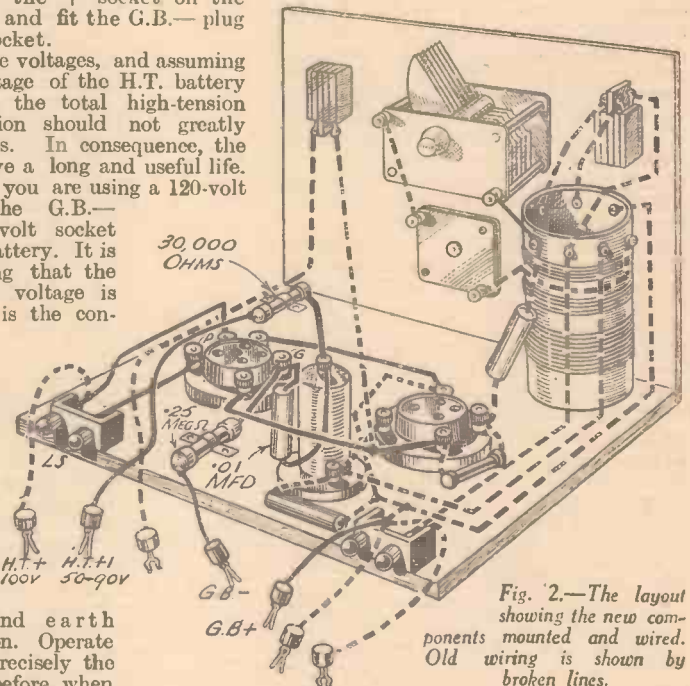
The layout showing the new components mounted and wired. Old wiring is shown by broken lines.
